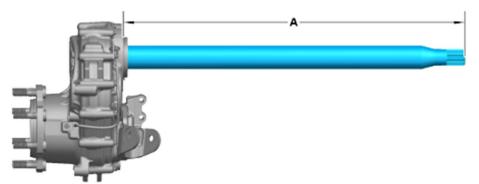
Left hub reduction gear, A installed dimension: 727.2 mm ±1.5 mm
